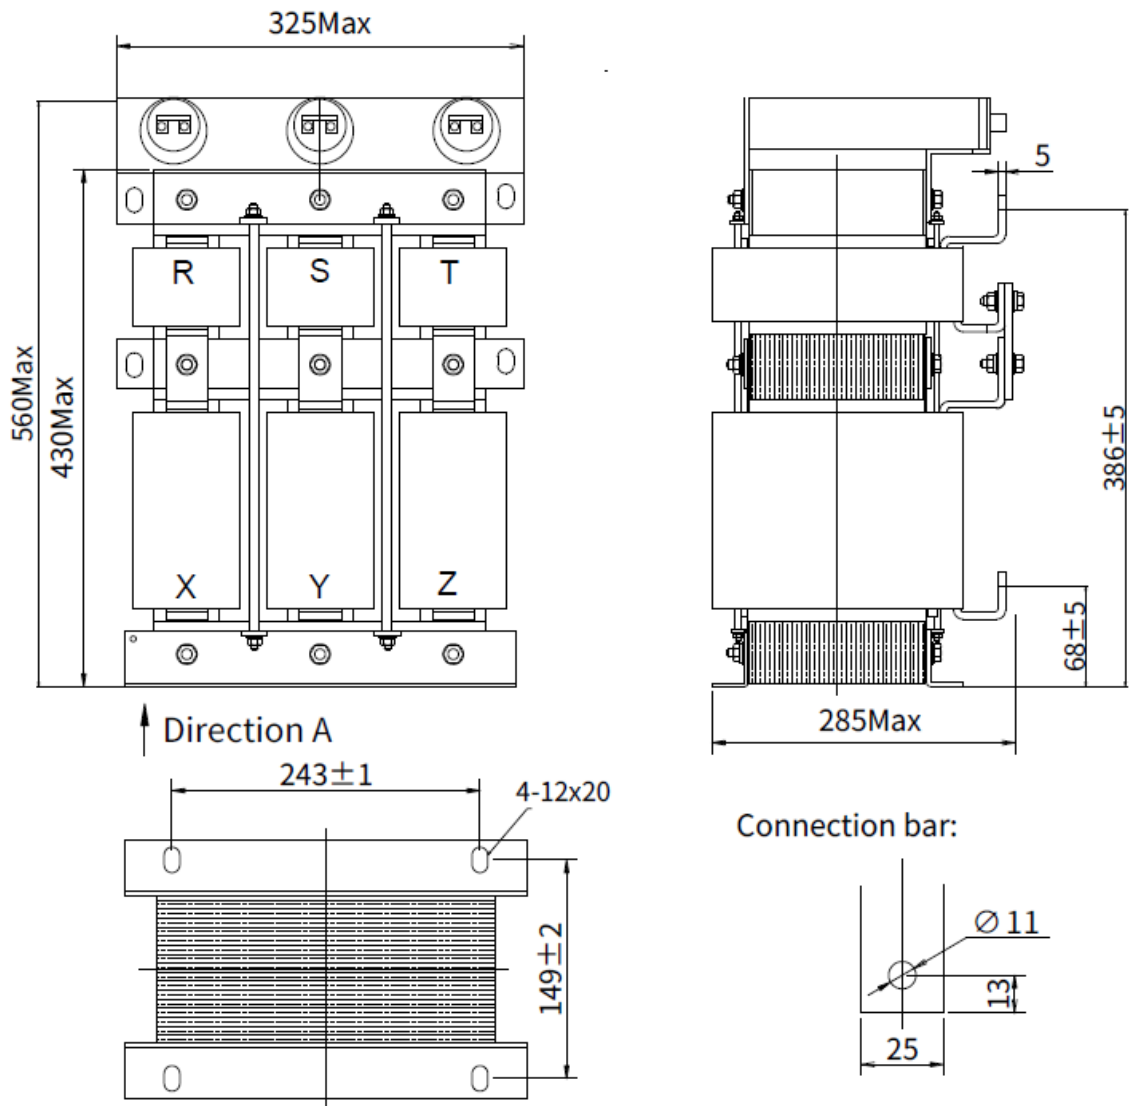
0312-0516 rectifier unit dimensions (unit: mm)
